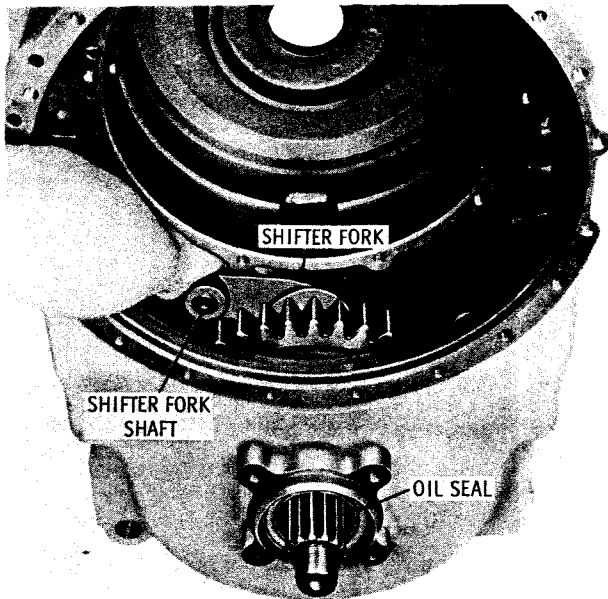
Installing disconnect shifter fork and shaft (-1 models with two-piece output shaft)
